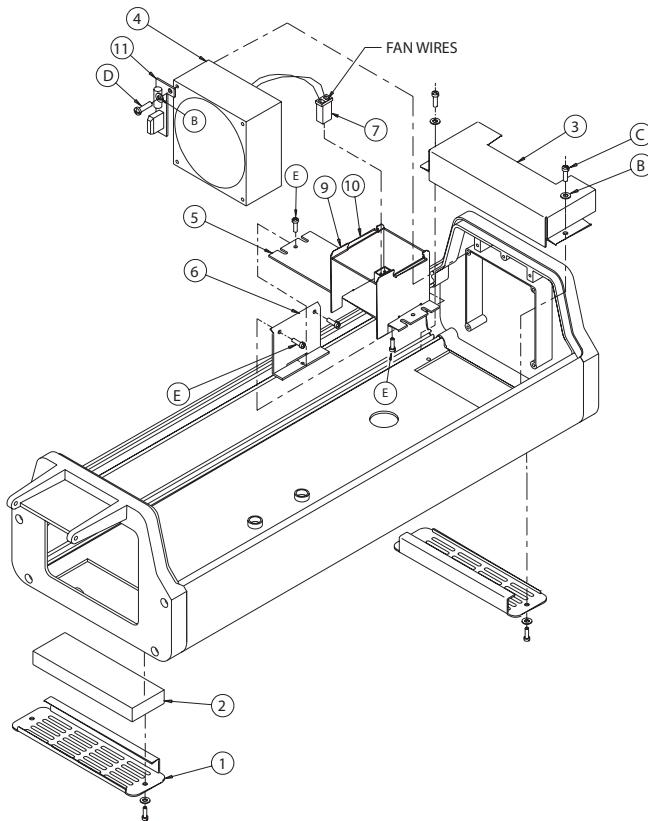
Exploded Assembly Diagram for Blower and Circuit Board
